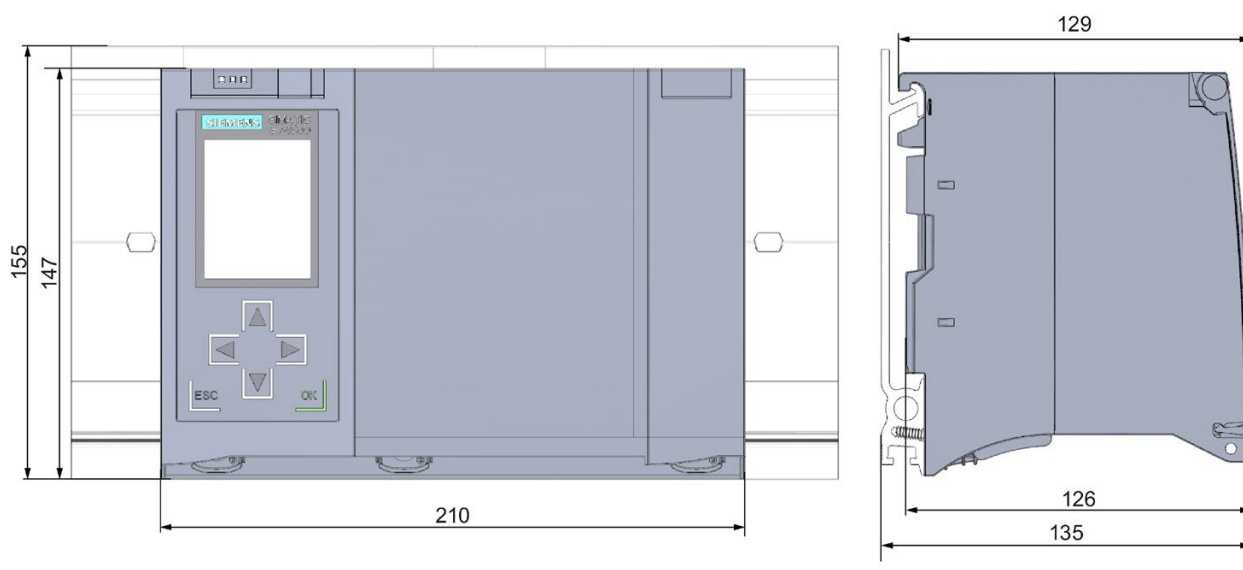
Dimension drawing of the CPU 1517H-3 PN, front and side view
